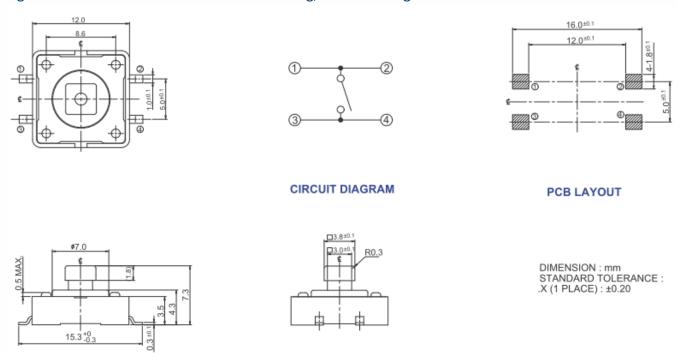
224AMVB... Surface Mount Gull Wing, Actuator Height 8.5mm
